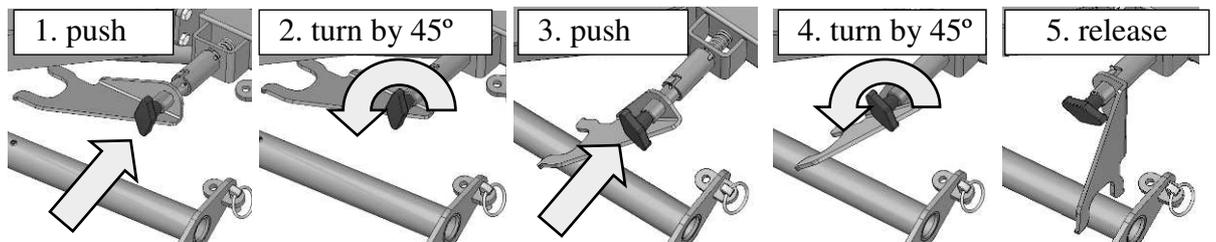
Transport locking assembly for locking rotations of the front rotor gear (DUO 740)
